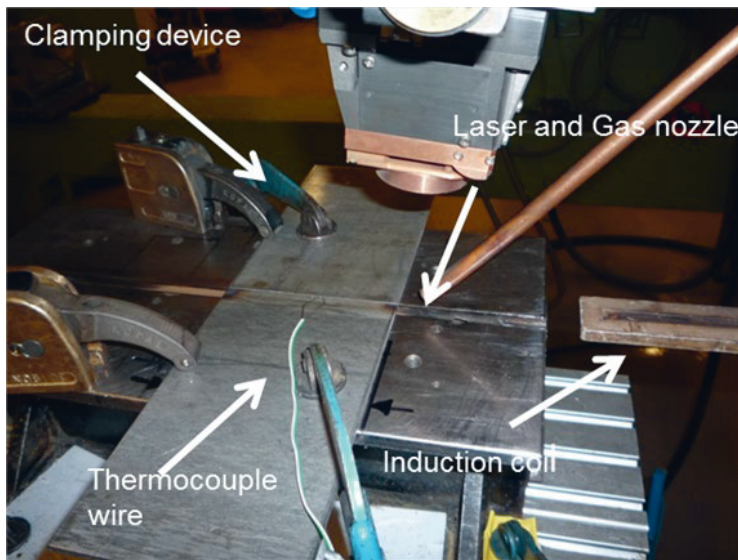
The configuration of the equipment used for laser welding and Q&P treatment.
